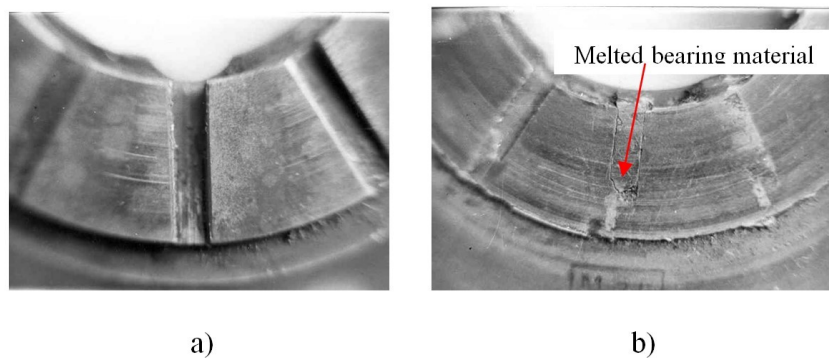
View of the axial part of radial-axial (fixed pads) bearing of high-speed compressor:
